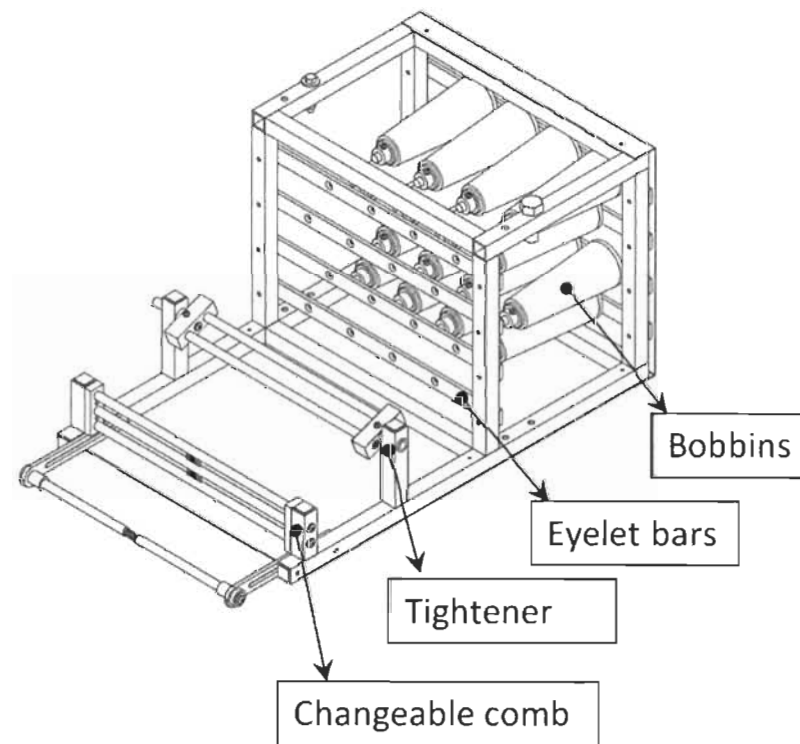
The feeding frame to deposit flax yarns into paper machine.
